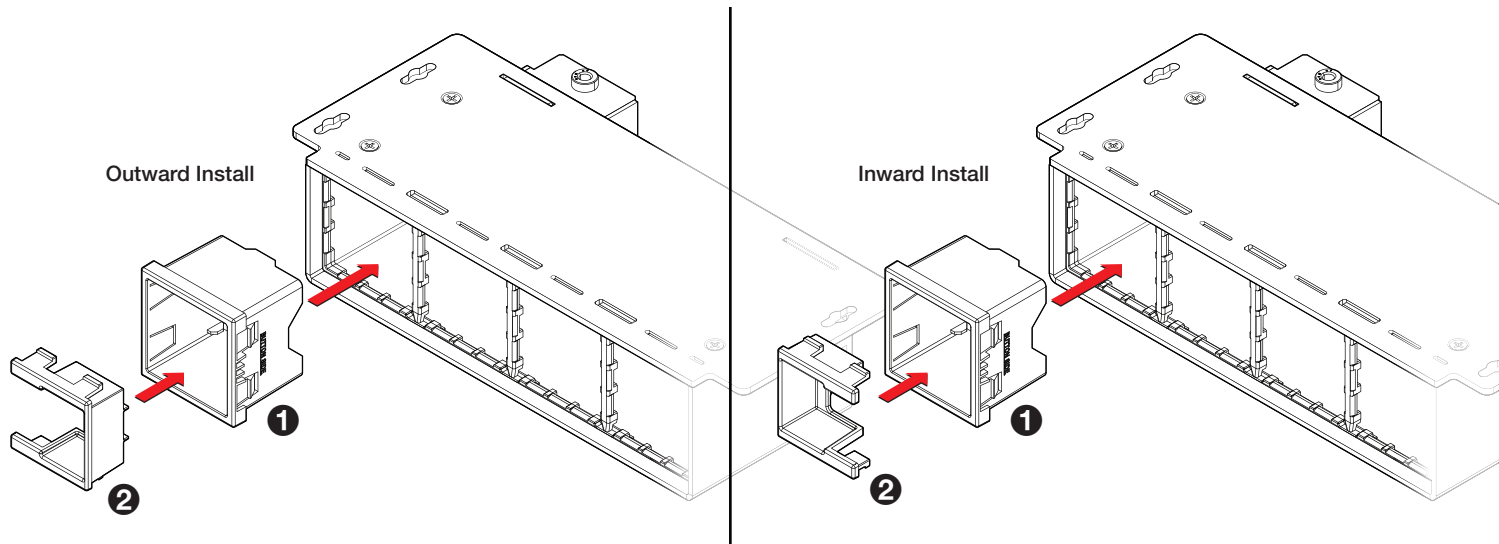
Installing the Flex55 Adapter Module and Retractor Bezel
